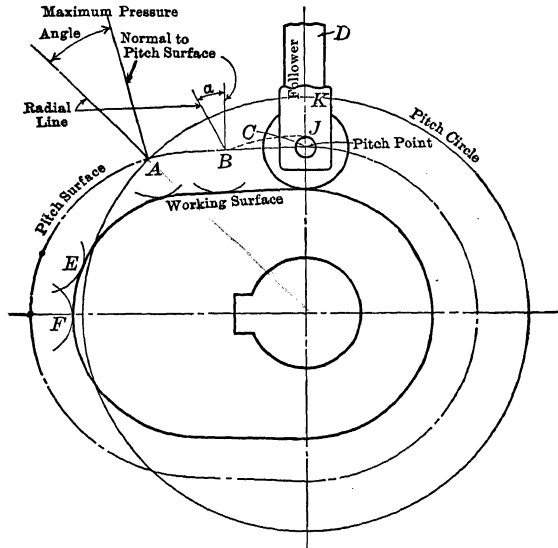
SHOWING NAMES OF SURFACES, LINES, AND POINTS OF A CAM
